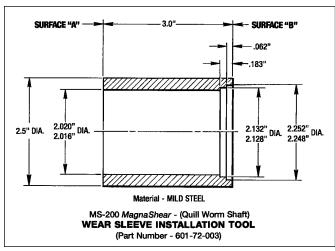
Wear Sleeve Installation Tool # 601-72-003
